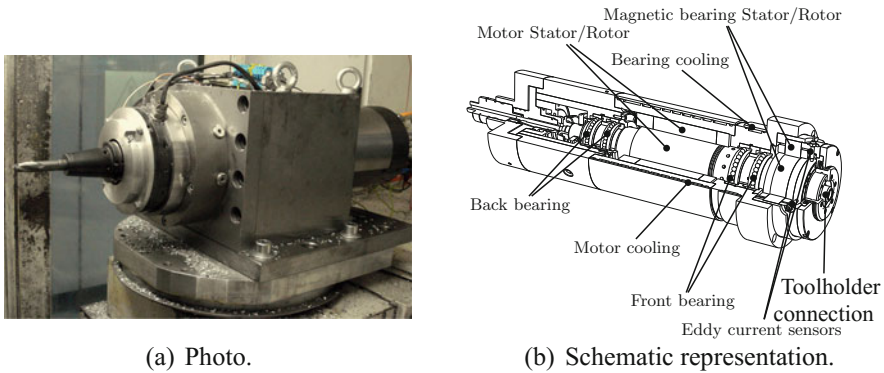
The experimental setup. An active magnetic bearing (AMB) is integrated into a machine spindle between the front bearings and toolholder connection. *Source* Institut für Produktionsmanagement, Technologie und Werkzeugmaschinen (PTW), Technische Universität Darmstadt, Germany
